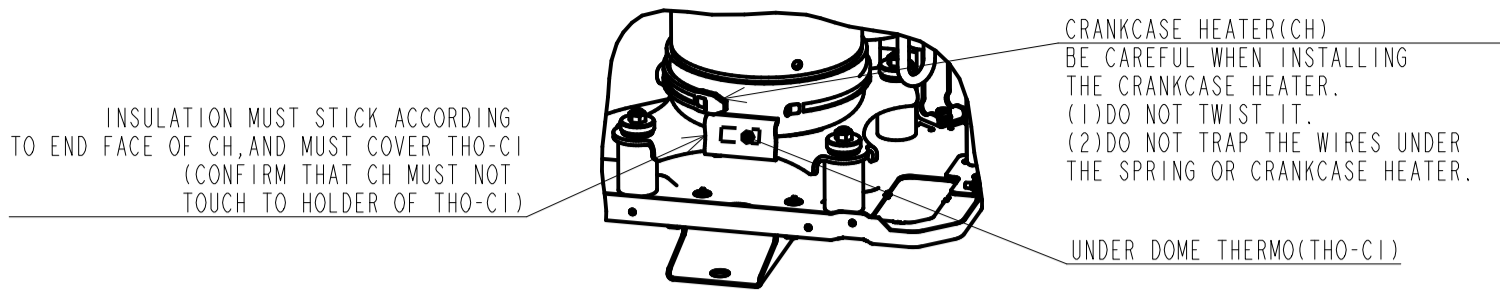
INSTALLATION DETAIL OF UNDER DOME THERMO
